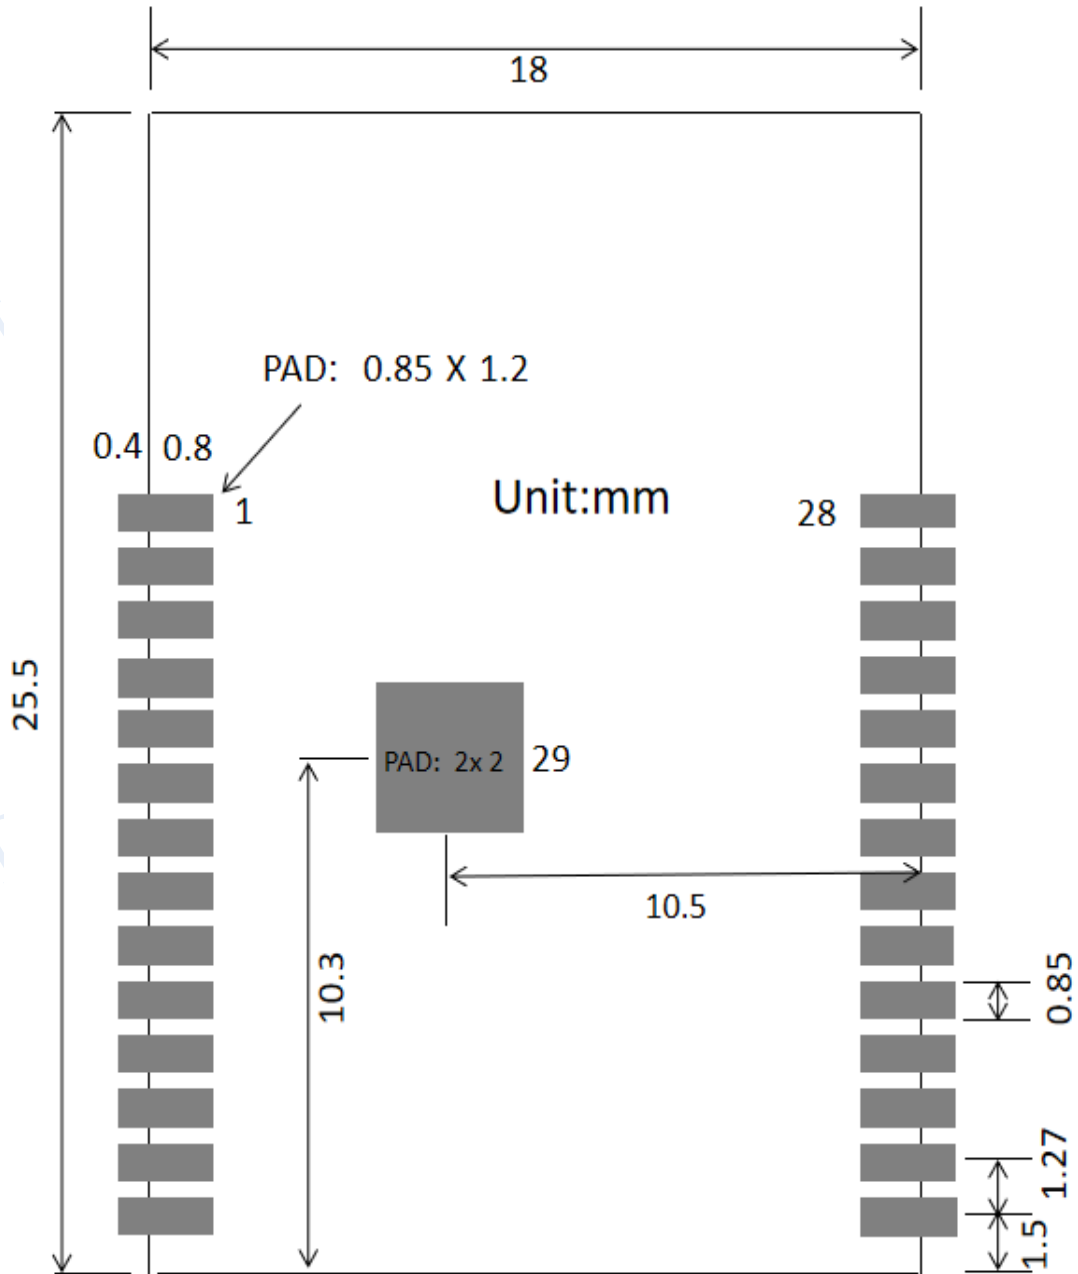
PCB Layout for ESPC6-WROOM-32 (Top view)
